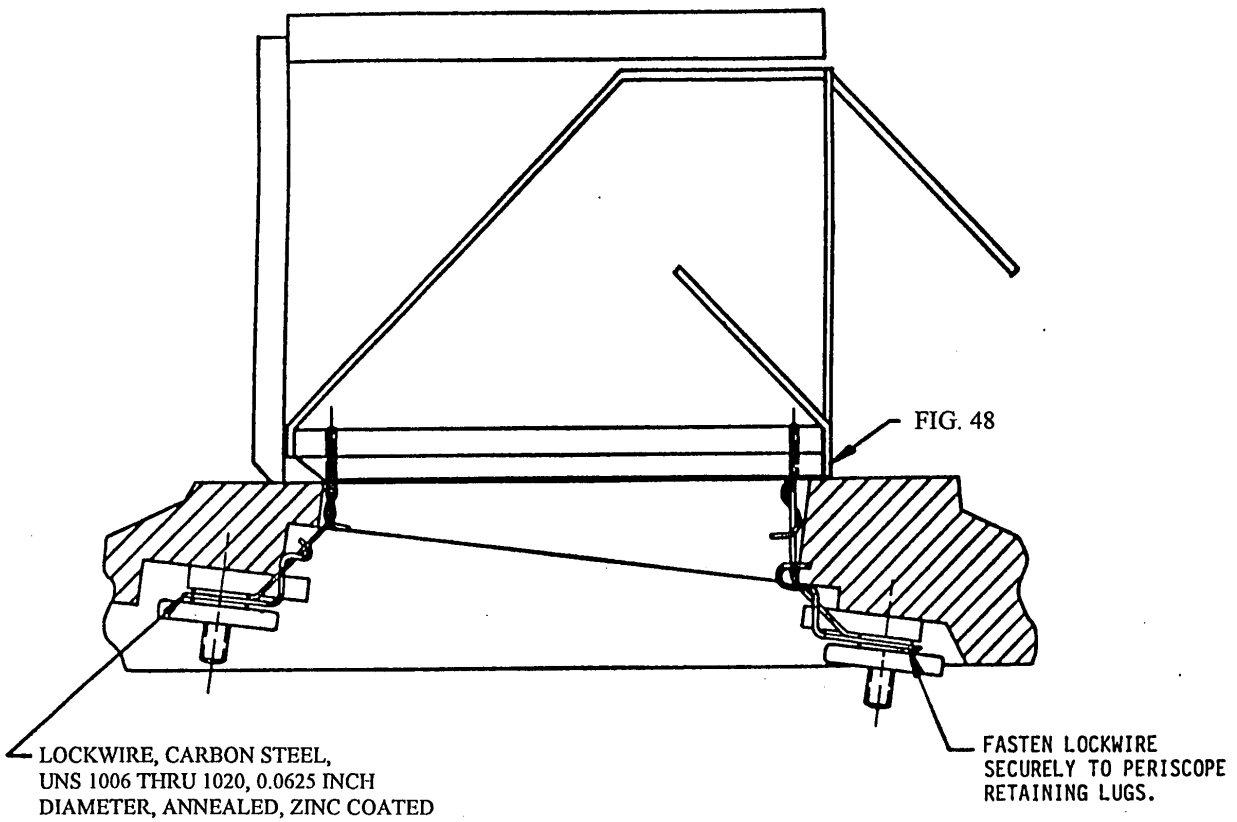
Installation of screen and baffle assembly in periscope openings.
